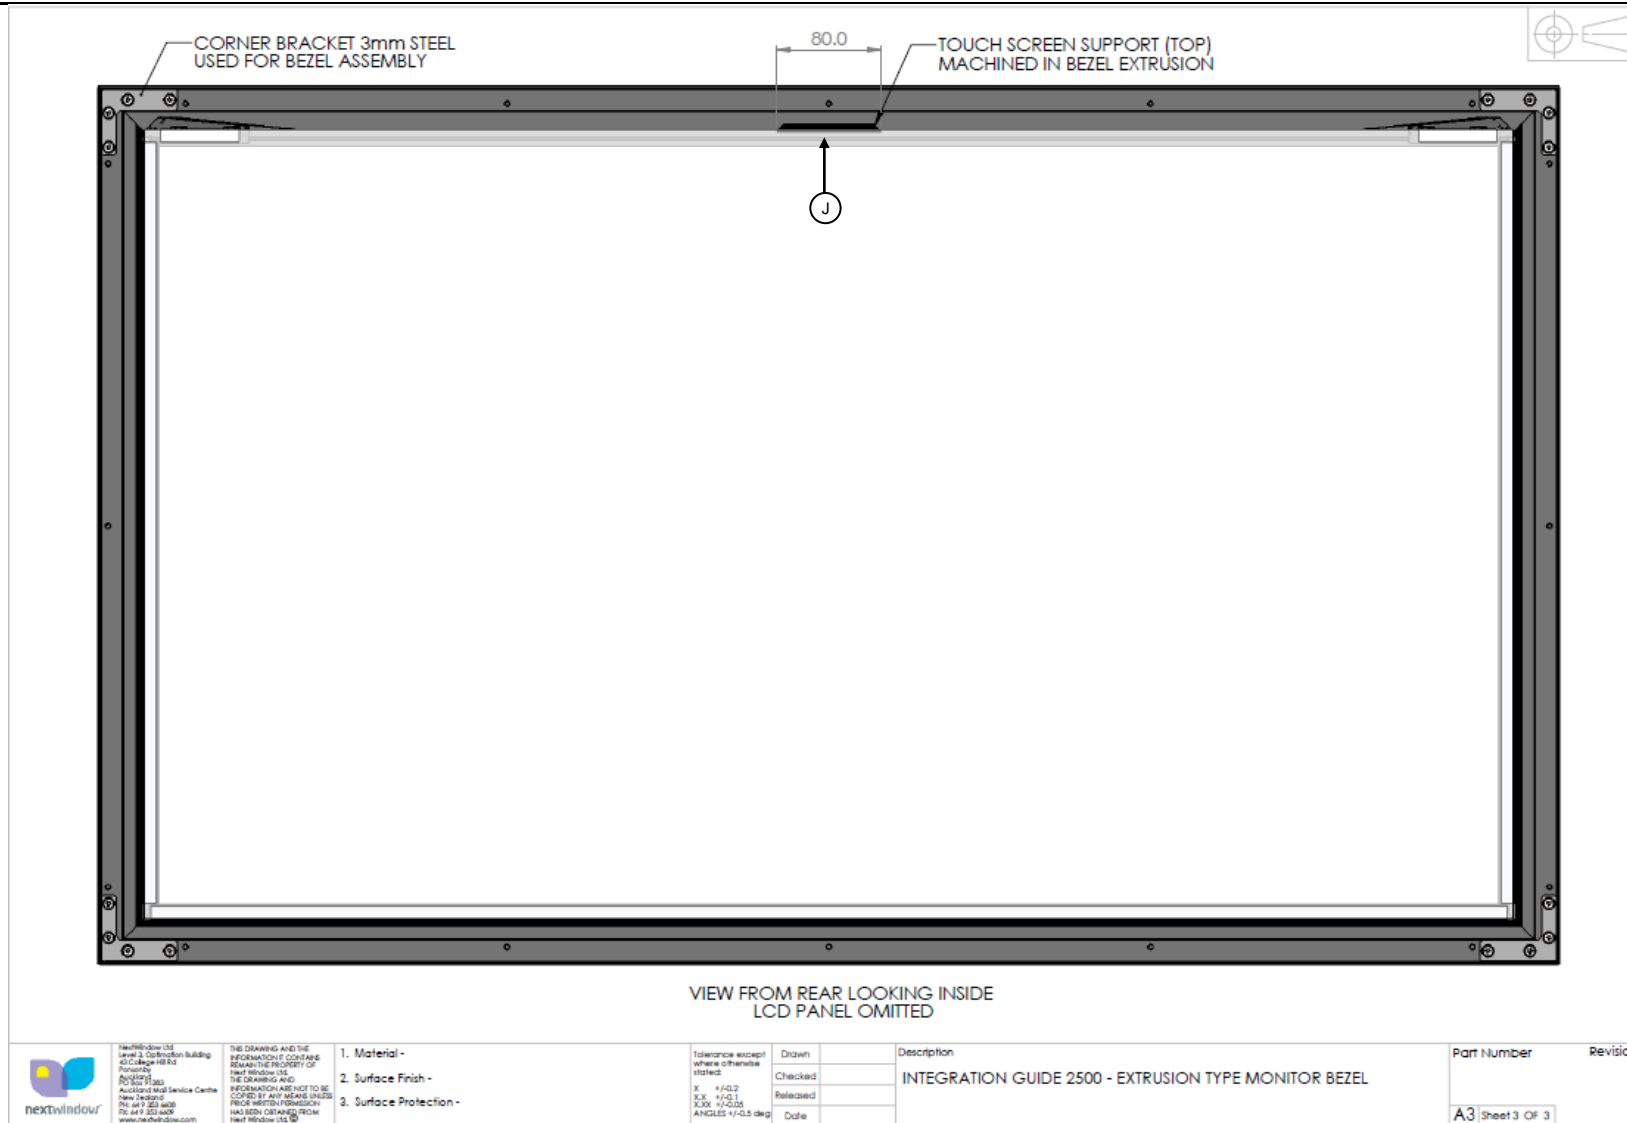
Rear view of extrusion type front bezel showing integrated 2500 touch screen
